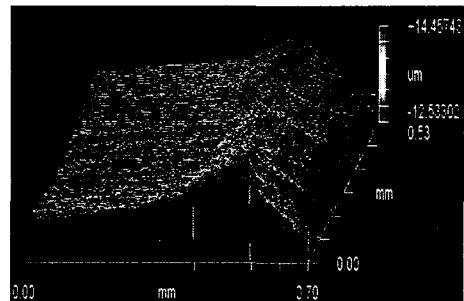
3-dimensional sculptured surface machining with micro milling machine
